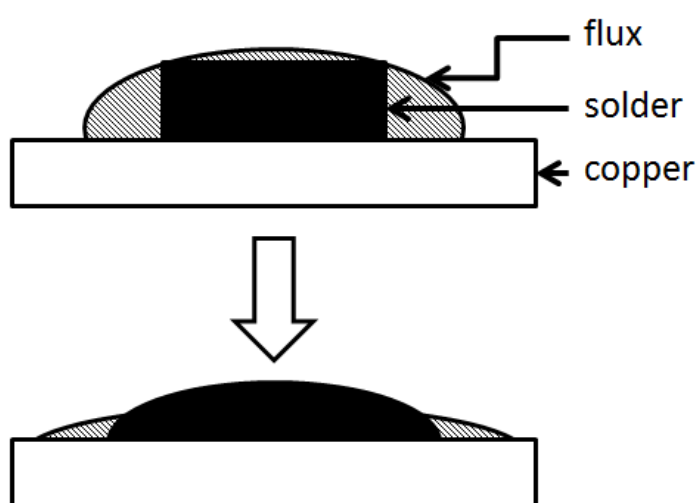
Schematic showing solder-alloy ingot spread on copper sheet in spread test
